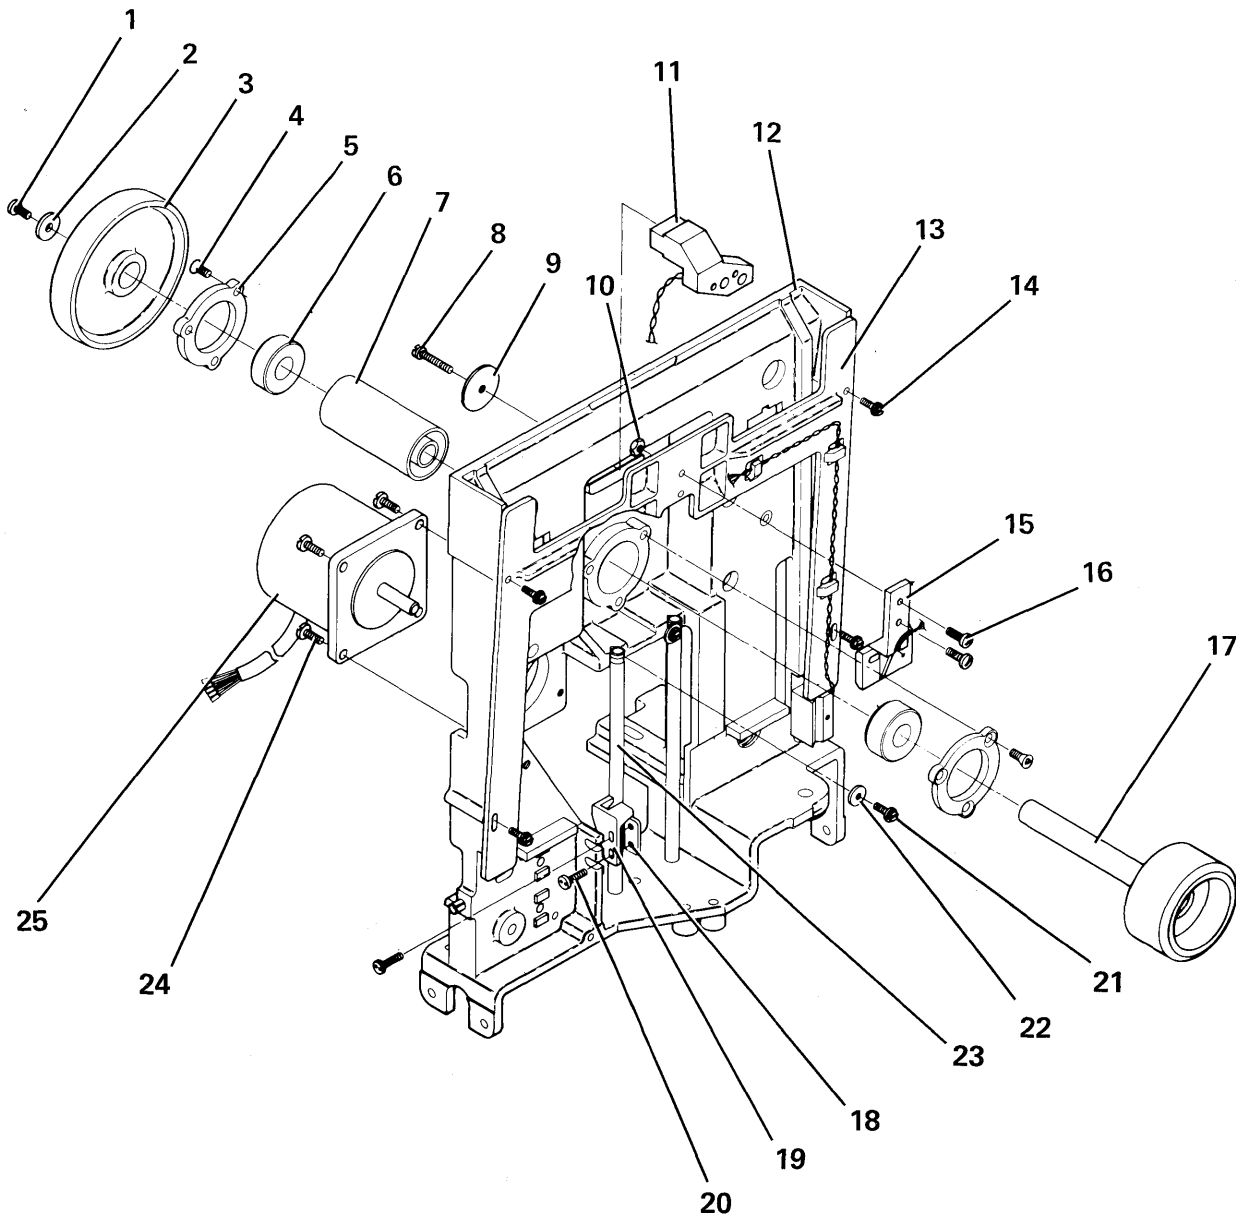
BASE PLATE ASSEMBLY. SEE LIST 16.
